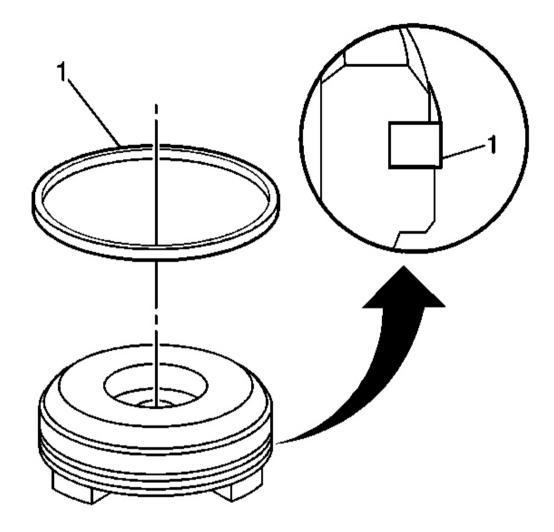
Identifying Accumulator Piston Seal Courtesy of GENERAL MOTORS CORP.
